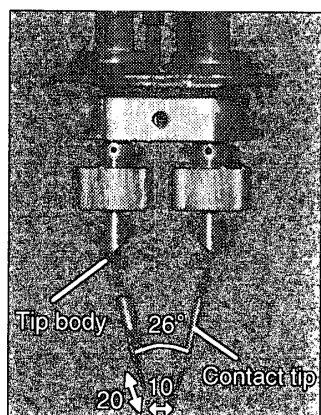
Welding torch for Tandem GMA welding without gas nozzle
